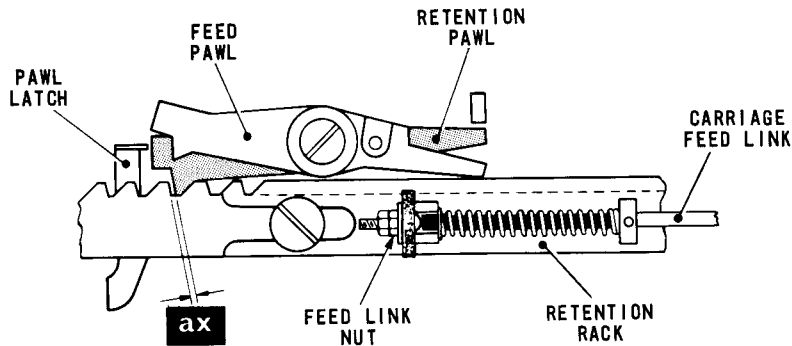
TYPEHEAD CARRIAGE FEED LINK
